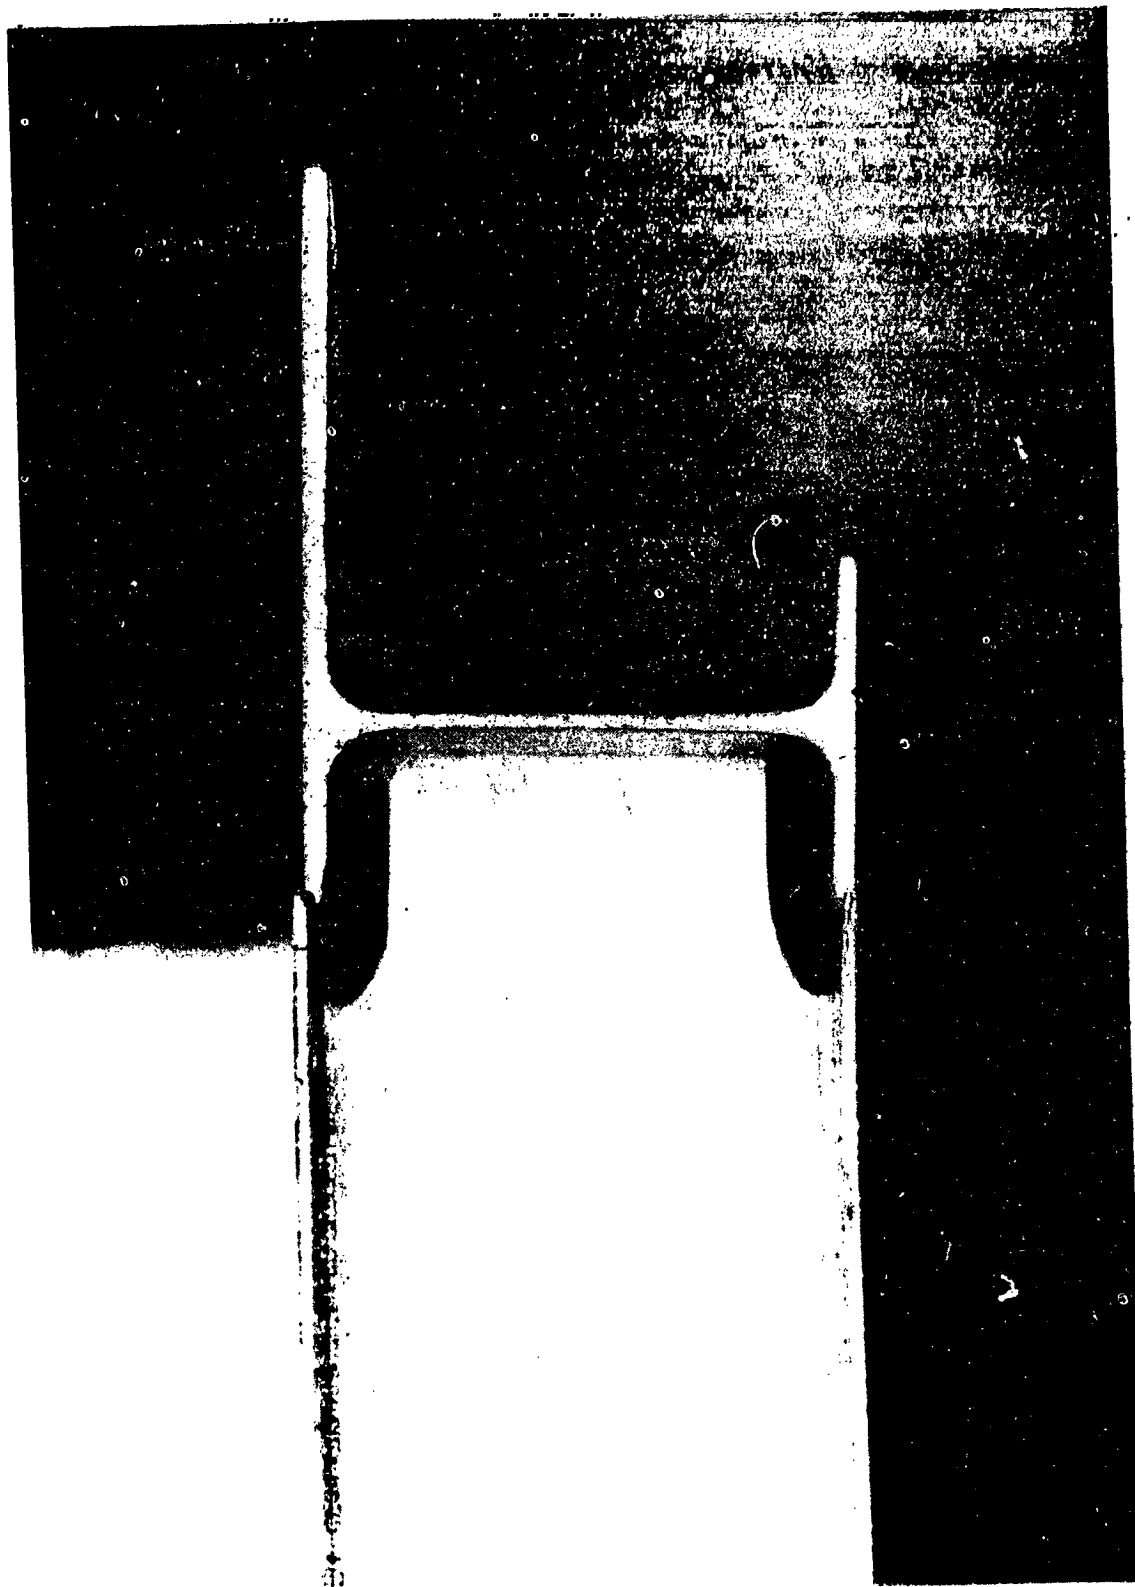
Detail of Closure Welds - Welded Panel to Beam - Ready for Welding, Tee-Stiffened Cb-752 Heat Shield Panel (128068B)
